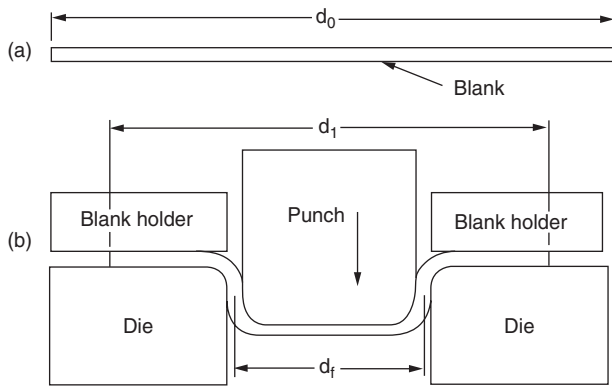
Schematic of the conventional deep drawing process for sheet metal parts. (a) Initial blank, (b) drawing in process.
